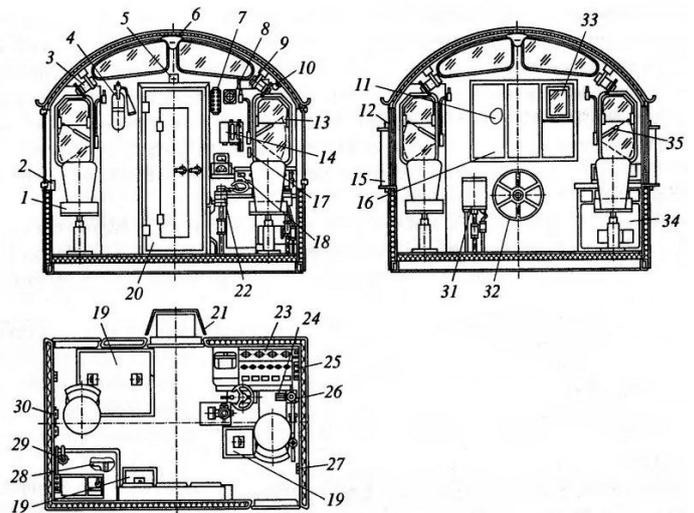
The location of the equipment in the cab (foot-plate) of the locomotive driver SML2:
